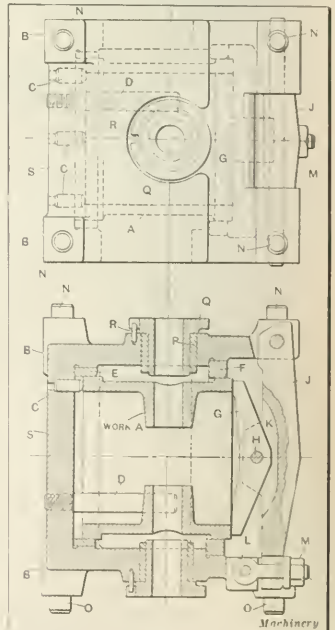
Jig with Interchangeable Bushings for Different Tools used in machining Cylindrical Part A
